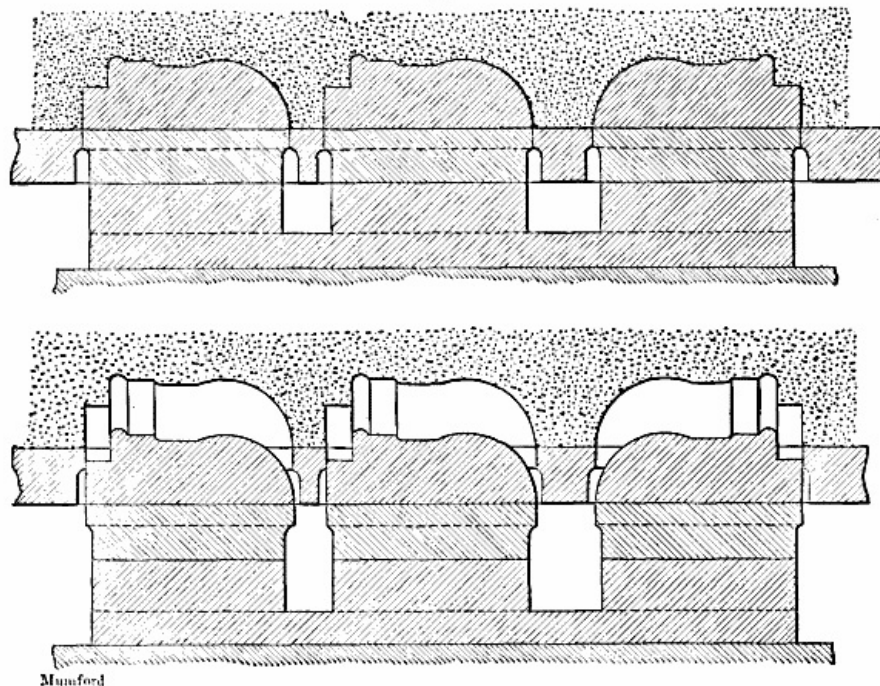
STRIPPING PLATE METHOD OF DRAWING PATTERNS.
